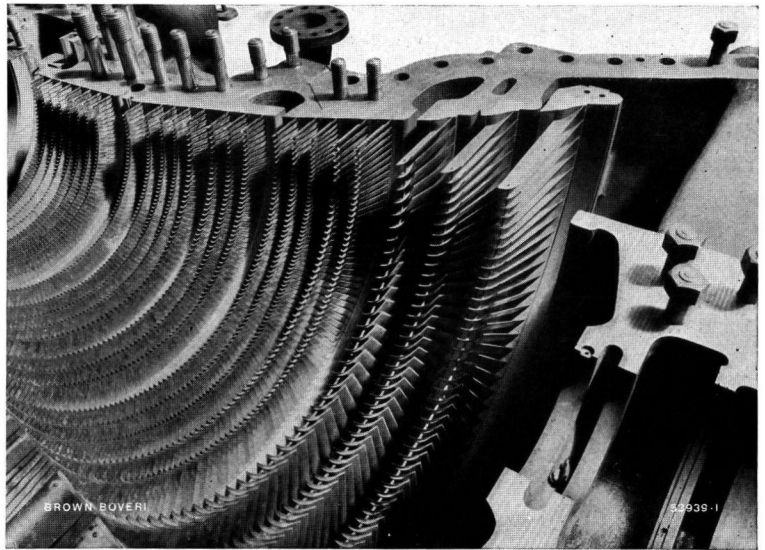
View of lower part of a cylinder with guide blades built in.
